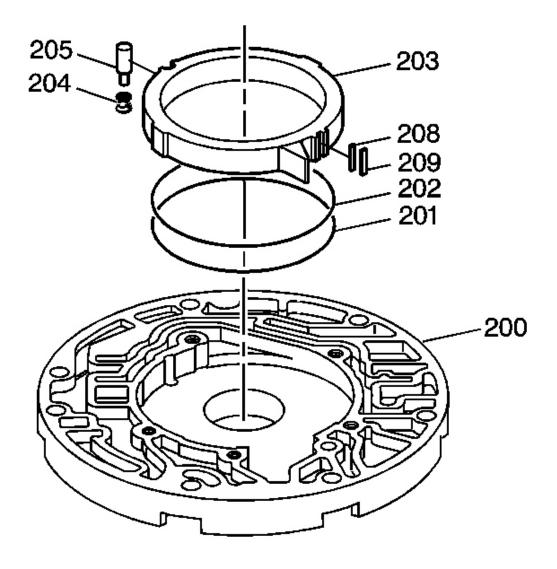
Identifying Oil Pump Slide, Pump Slide Support Seal & Pump Slide Seal Courtesy of GENERAL MOTORS CORP.
